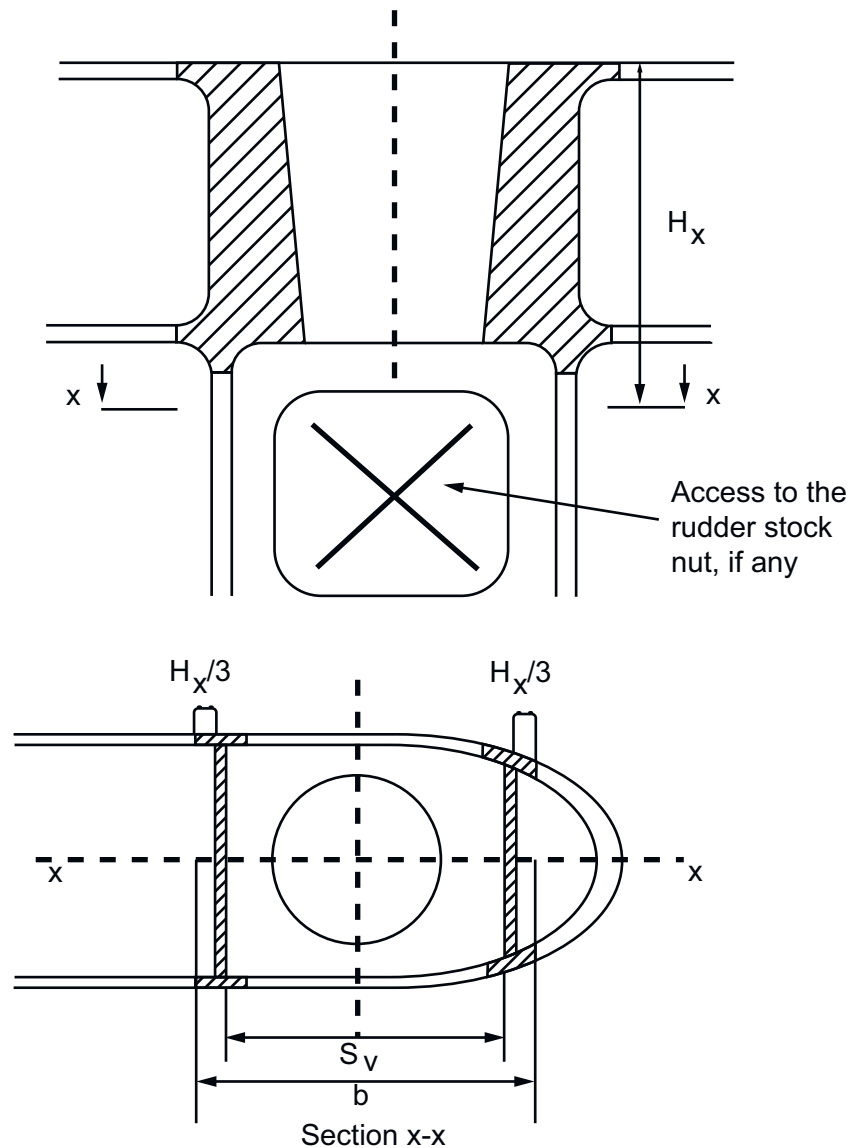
Cross-section of the connection between rudder blade structure and rudder stock housing
